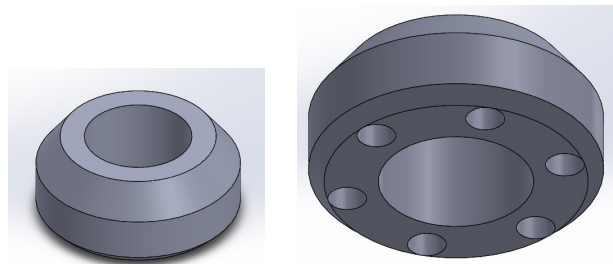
Modified pre-load nut design detailing top (left) and bottom (right) isometric views
